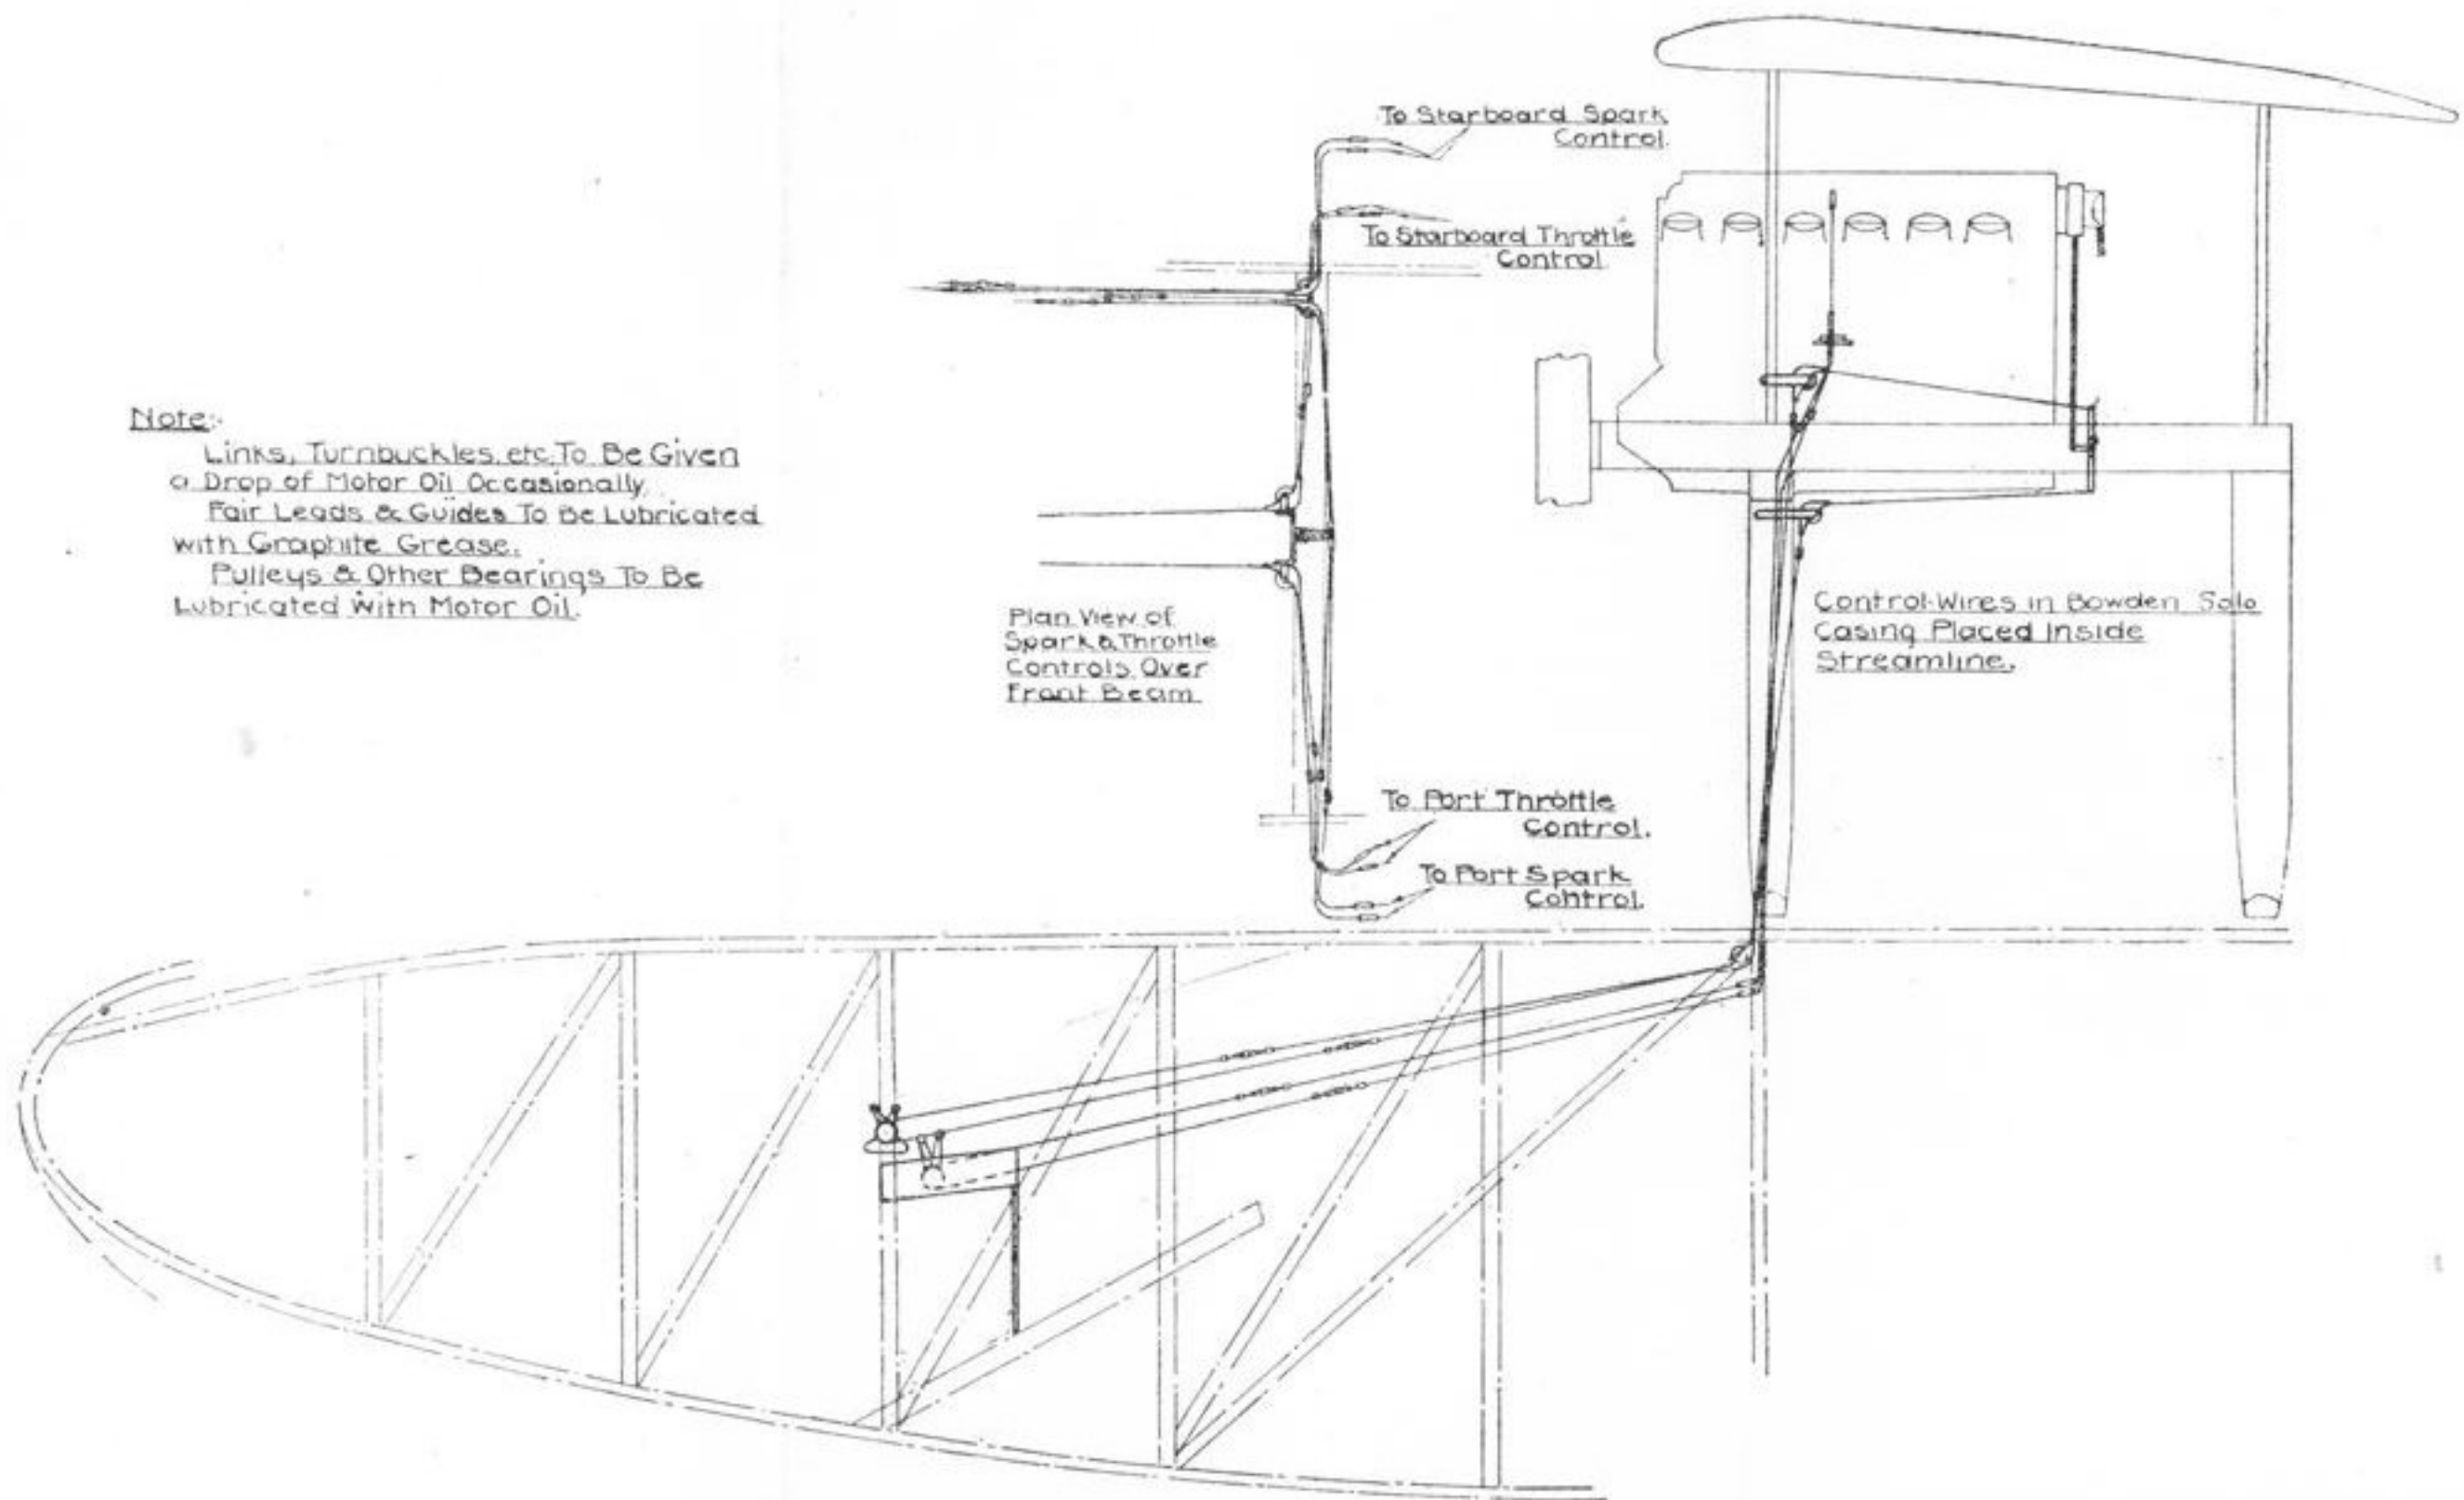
LUBRICATION CHART OF MOTOR CONTROL.
